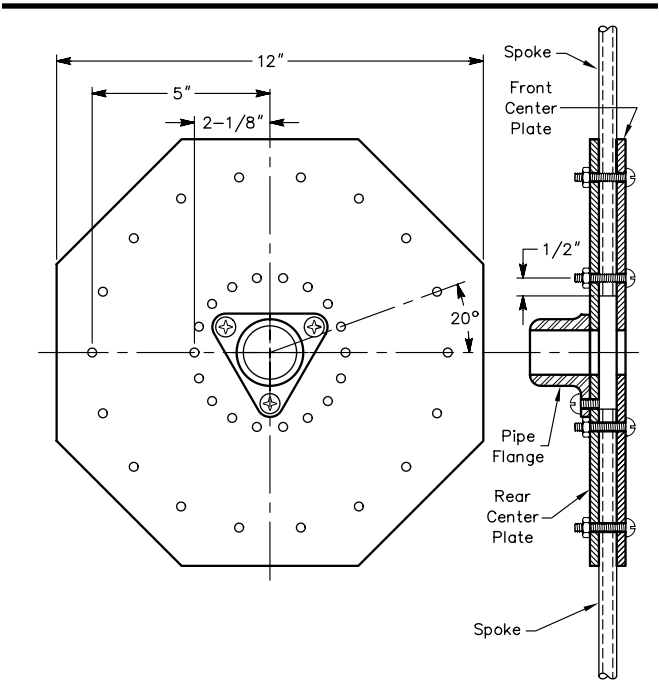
Center plate details. Two center plates are bolted together to hold the spokes in place.
